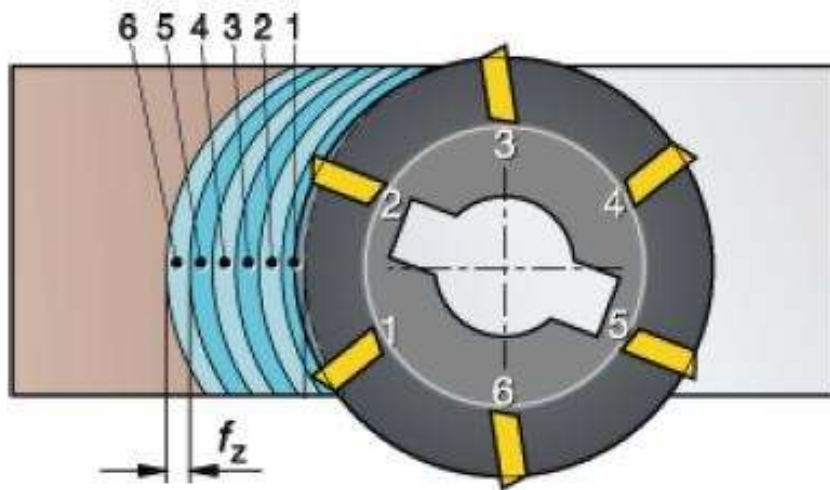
Feed per tooth ( $f_z$ , mm/tooth) [10].
